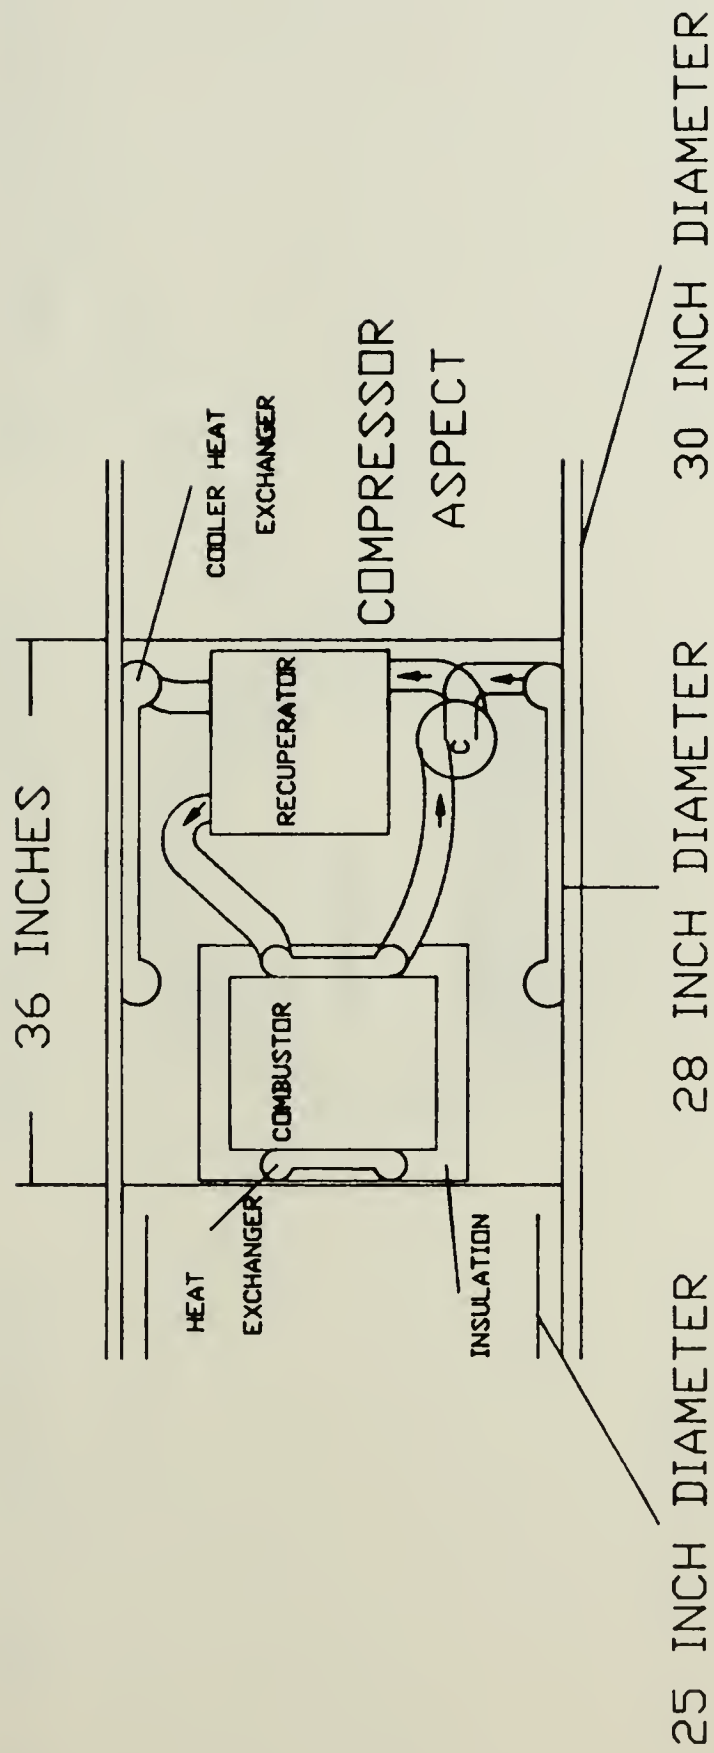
SIDE VIEW OF A 30 INCH DIAMETER VEHICLE
